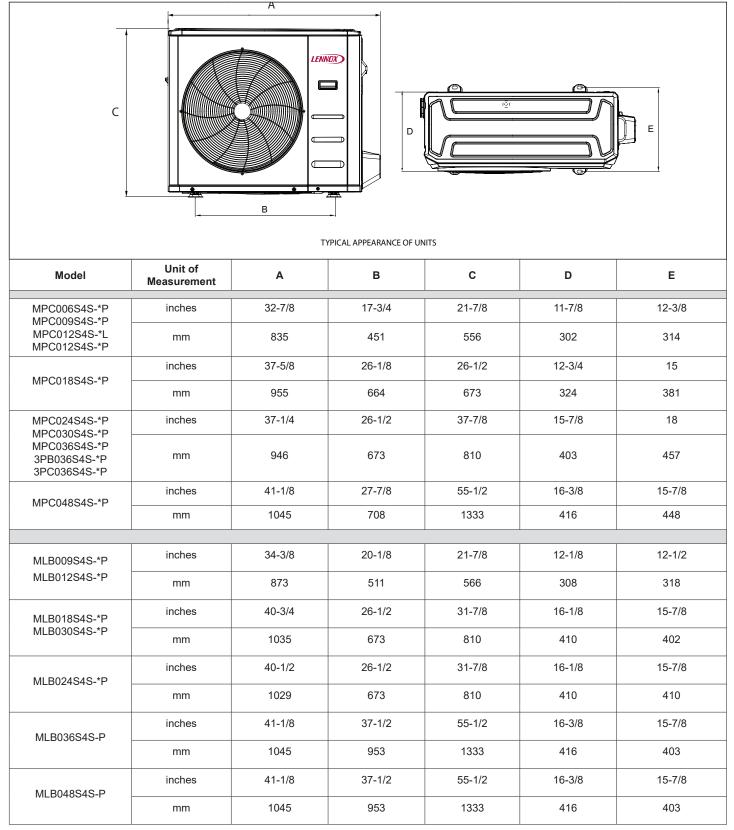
Single-Zone Outdoor Unit Dimensions - Inches (mm)
